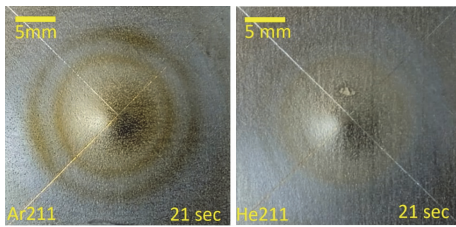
Weld root side surfaces after welding for 21 seconds purged with Ar (left) and helium (right)
